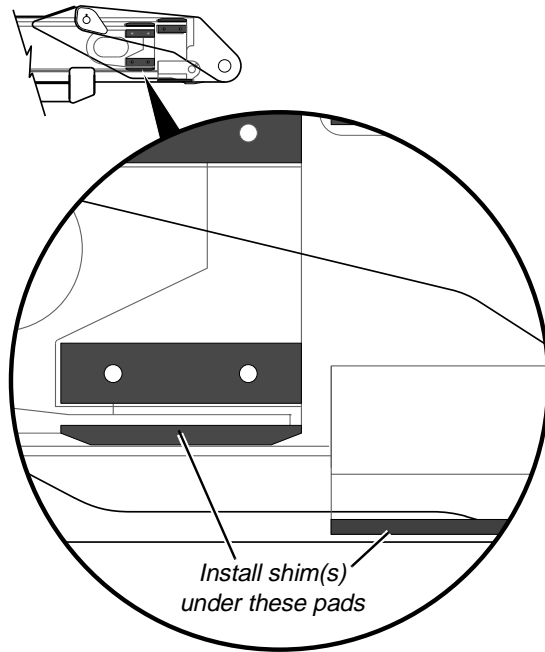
Lower Shim Installation – Rear of 3-Section Boom
